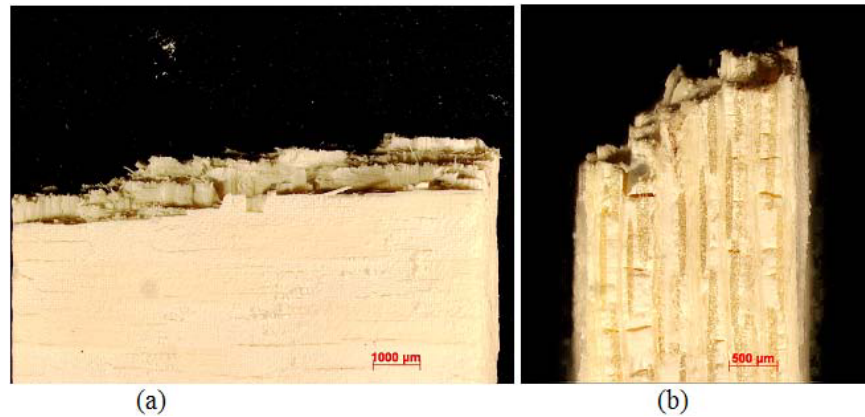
Fracture surface of C6 composite specimen tested in creep at 32 MPa at 1100 °C in steam ($t_f = 3.47$ h): (a) front view and (b) side view.
